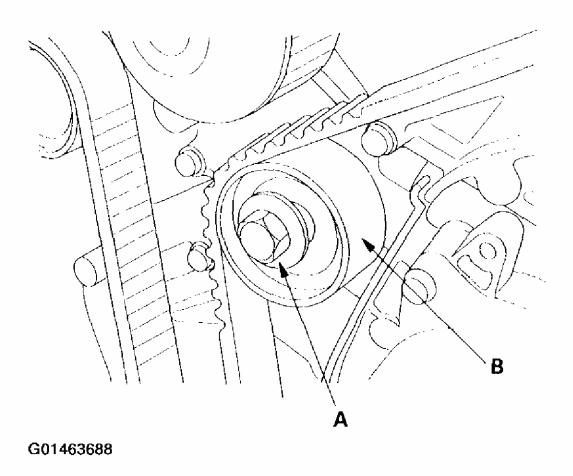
Removing The Idler Pulley Bolt & Idler Pulley Courtesy of AMERICAN HONDA MOTOR CO., INC.
